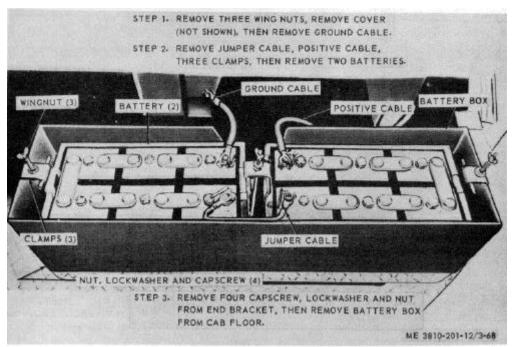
Battery and Battery Box removal and installation (nonwinterized units).
